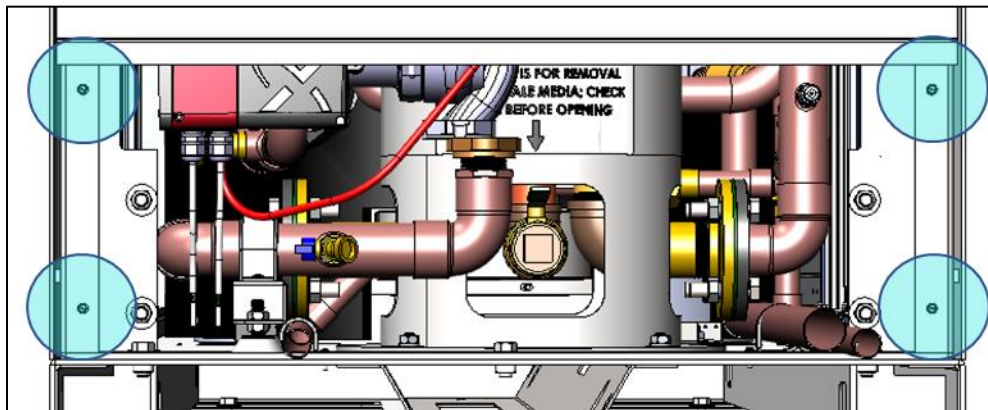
Rear Panel with Locations of Panel Screws Highlighted
